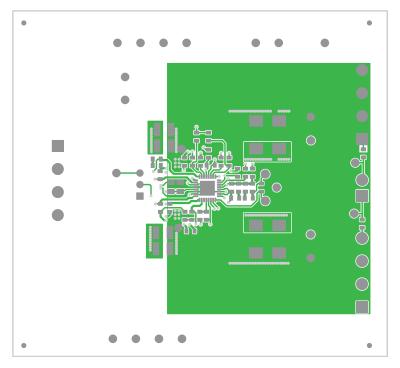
TPS40322EVM-074 Bottom Copper (bottom view)
